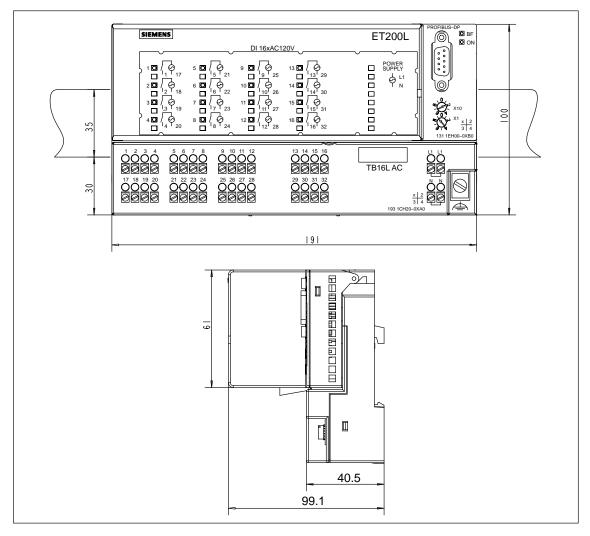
The TB 16L AC Terminal Block with the Electronics Block Mounted, Dimension Drawing (mm)
